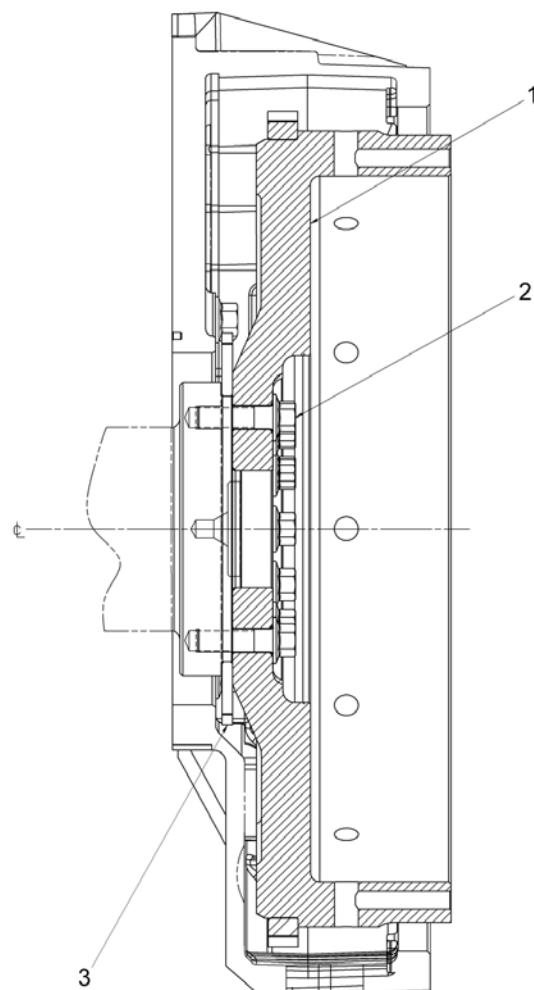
Pot type flywheel - for multiple plate clutch applications (800 lbf·ft and above)
